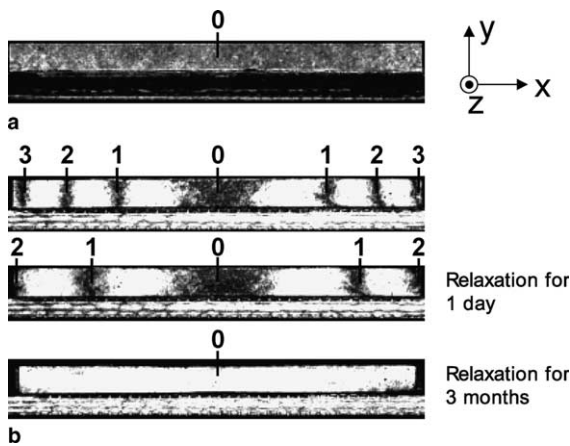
Residual warpage measurement after solder reflow process: (a) SP (Sn/37Pb) chip; (b) SAC (Sn/3.0Ag/0.5Cu) chip.
